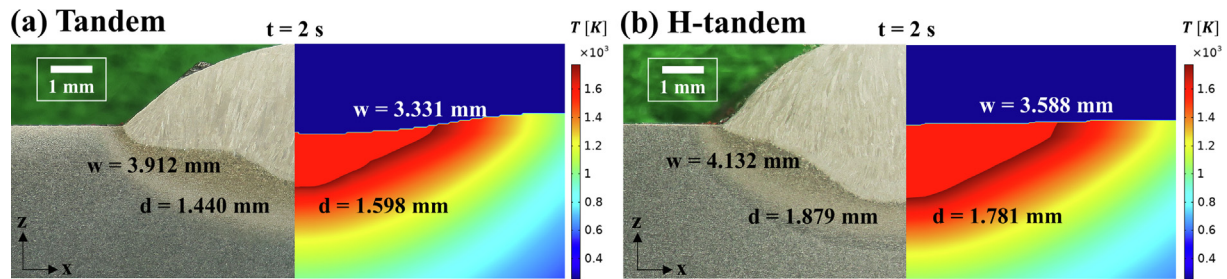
Verification of the analysis model using weld cross-sections: (a) tandem; (b) H-tandem process.
